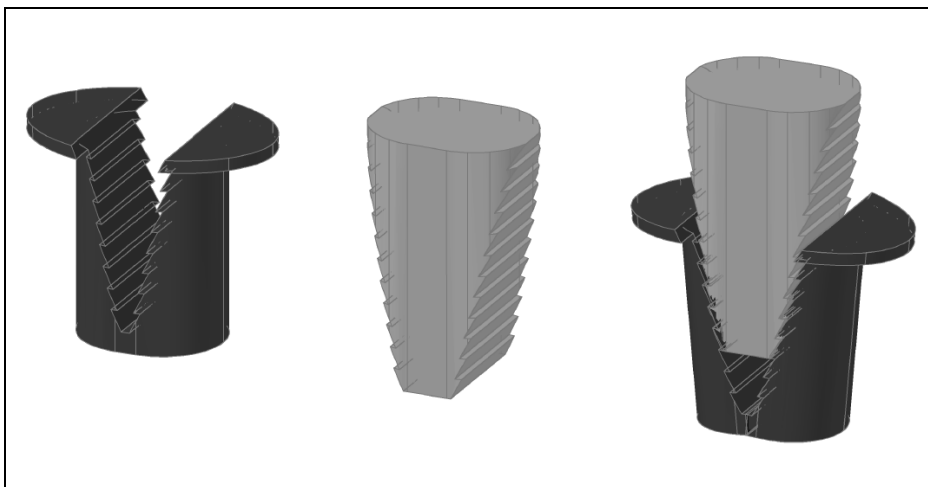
Wedge for the connections of the top longitudinal beam bars
